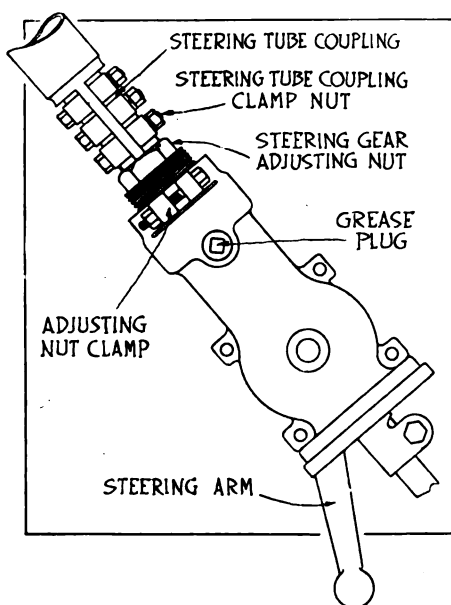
Backlash in the steering gear due to wear may be removed by turning the adjusting nut to the right
